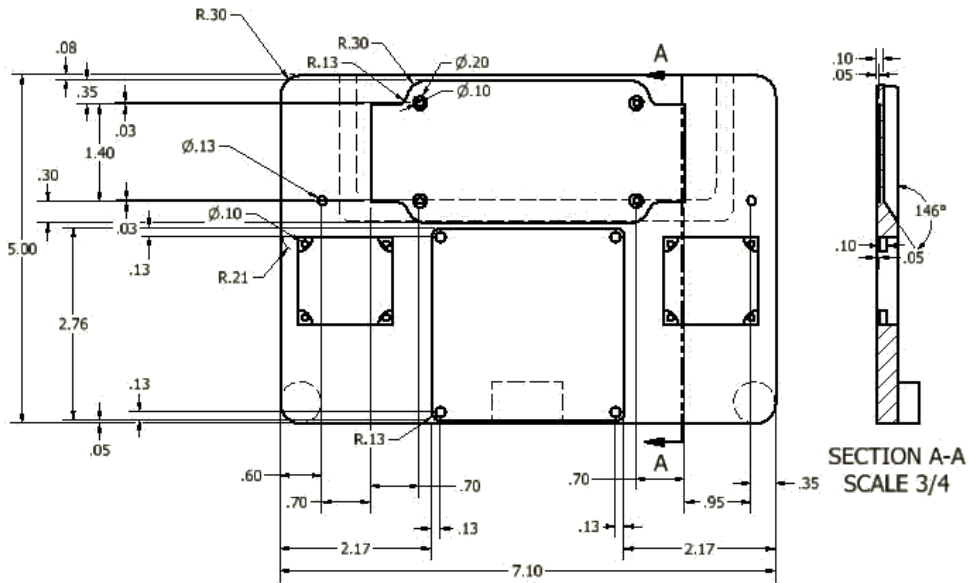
MOUNTING PLATE DRAWING 1 OF 2 FOR SYSTEM COMPONENTS (DIMENSIONS IN INCHES)
